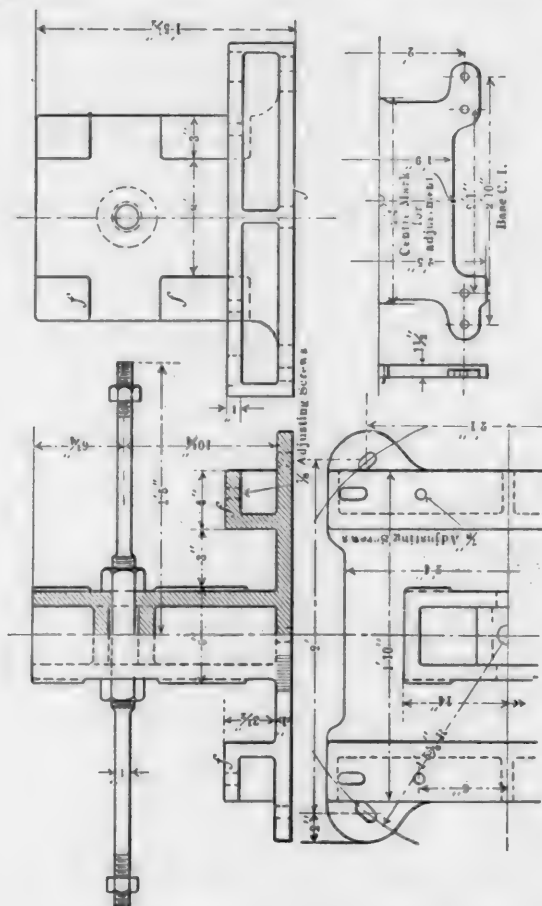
JIG FOR HOLDING DRIVING BOXES WHILE MILLING THE SHOE AND WEDGE FITS.
